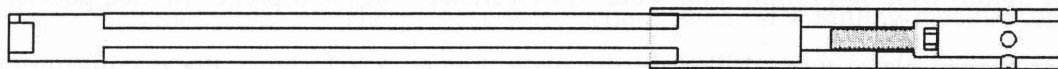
Sectional view of permanent assembly of cantilever cylinder
